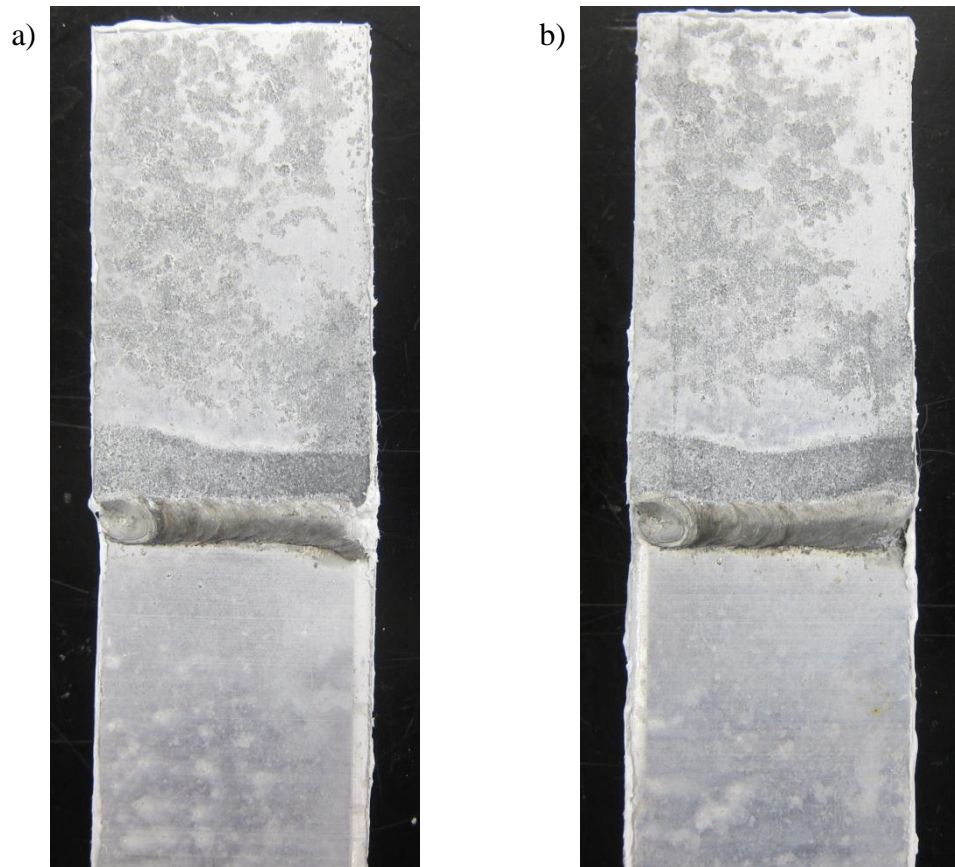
Duplicate samples of lap-joint welded configuration D3 (ER4043/AA7003/L) in the as-welded T6+PB condition.
